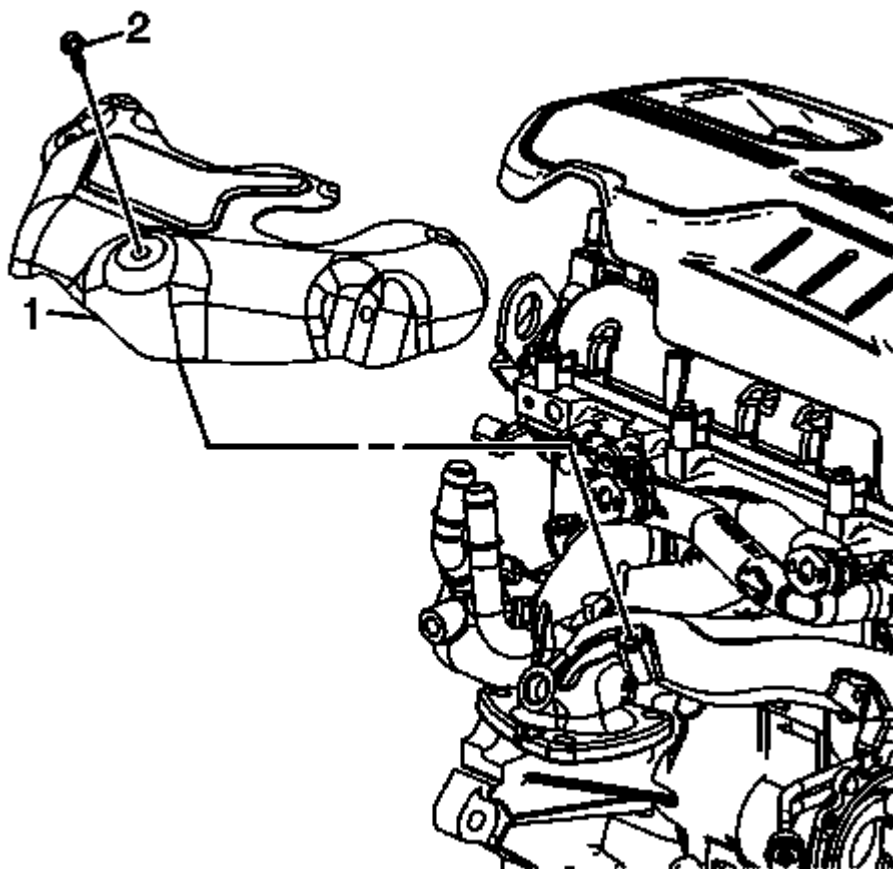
Exhaust Manifold Heat Shield And Bolts
